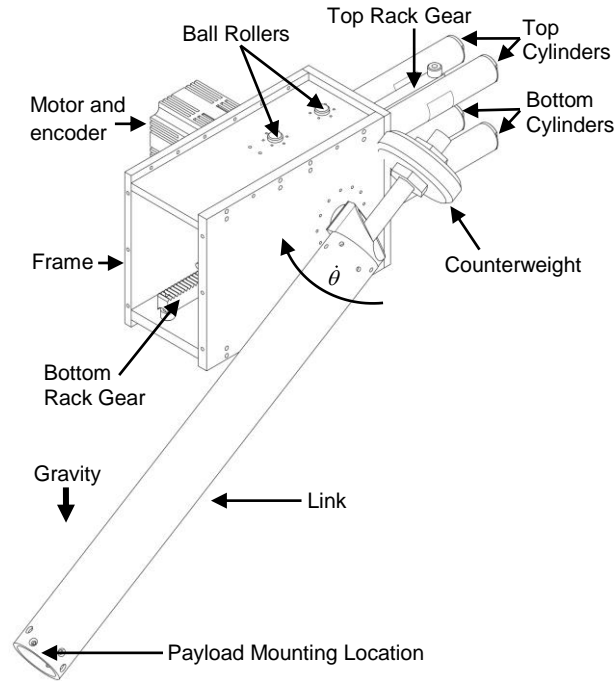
Assembly drawing of the rotary hybrid actuator.
